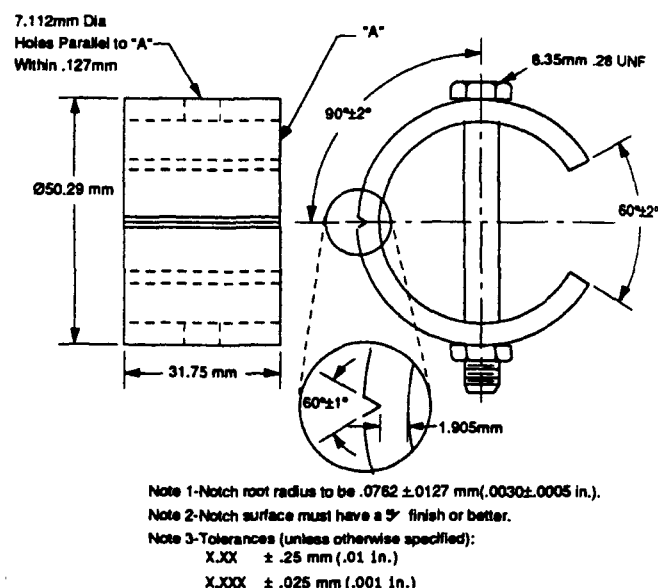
Dimensional requirements of Type 1d ring bend specimens with loading bolt (reprinted from ASTM F 519, Type 1d).
